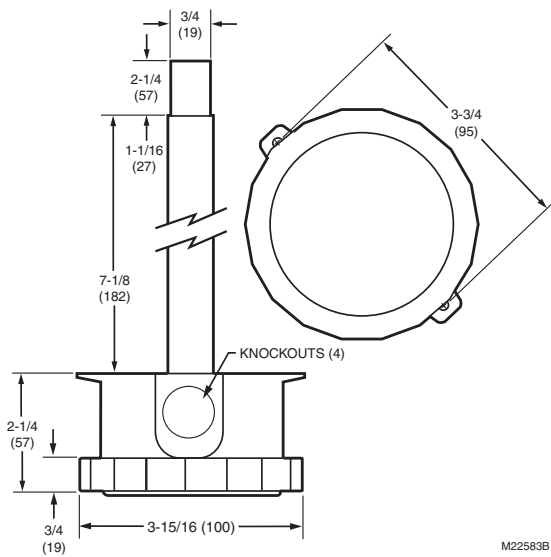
Duct-mount Sensor Dimensions in In (mm).
